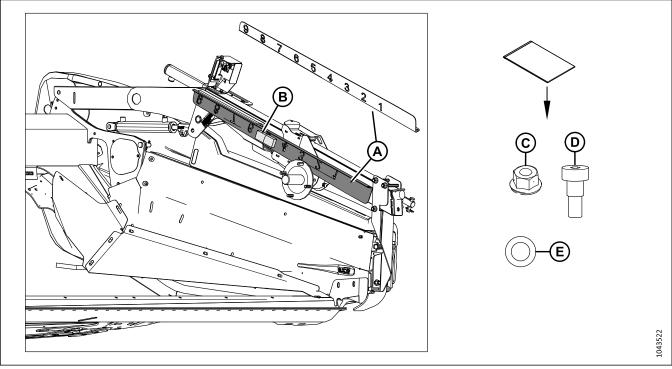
Fore-Aft Indicator Shipping Location, Parts Bag MD #368002
